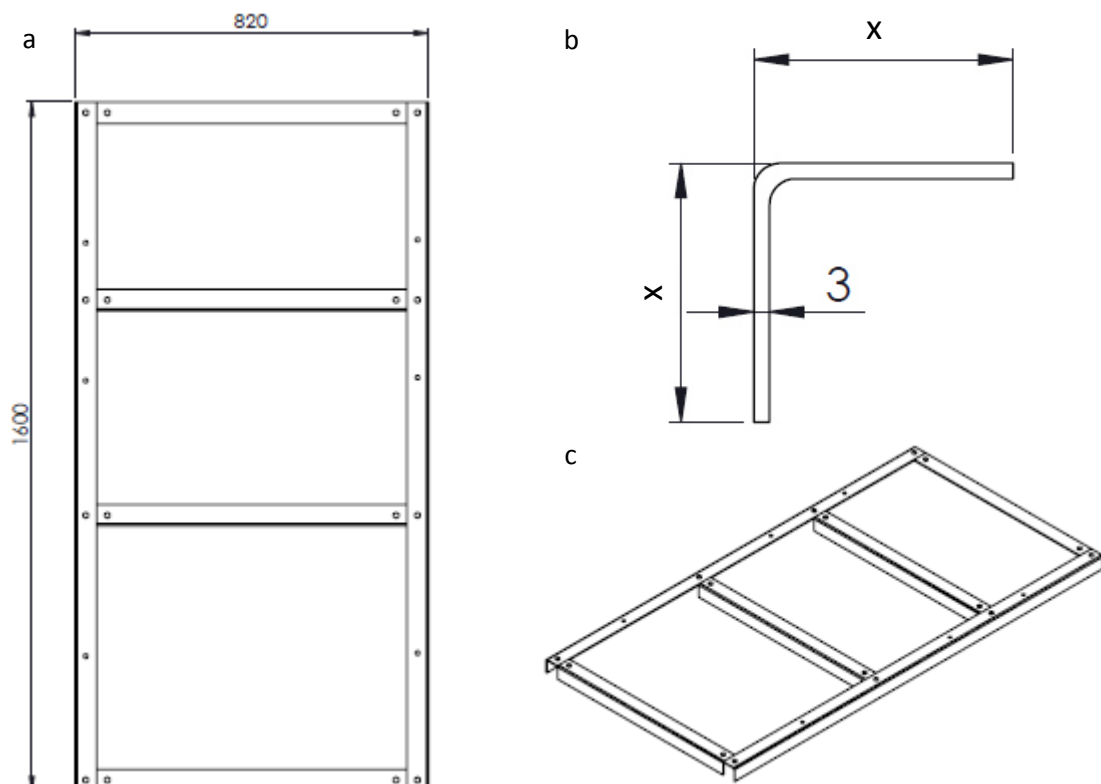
Support structure: a) Top View with overall dimensions, b) Section View of extruded angle with  $x$  representing the length of the side, and c) Isometric View
